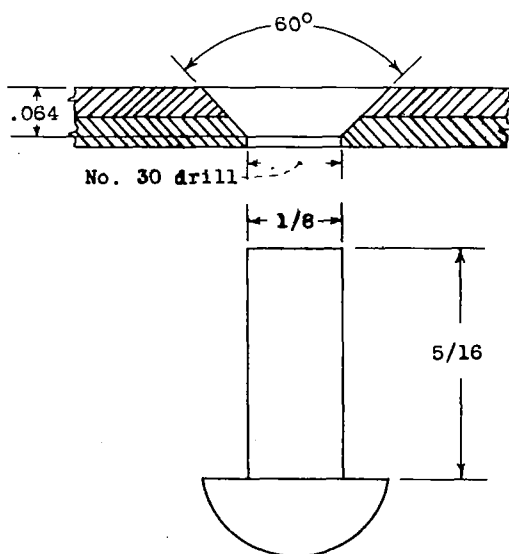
Dimensions of roundhead rivet and angle of countersink used in riveting method E for 1/8-in. rivet.
